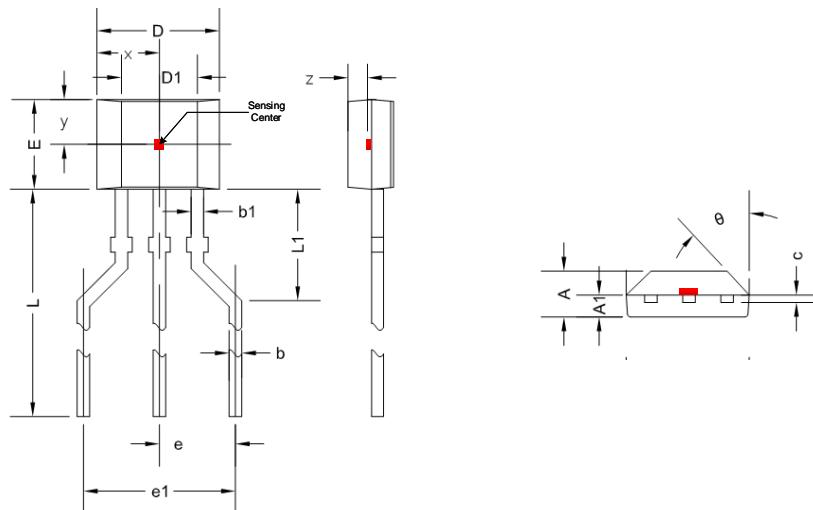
Flat TO-92 (Radial Lead) Package Drawing
